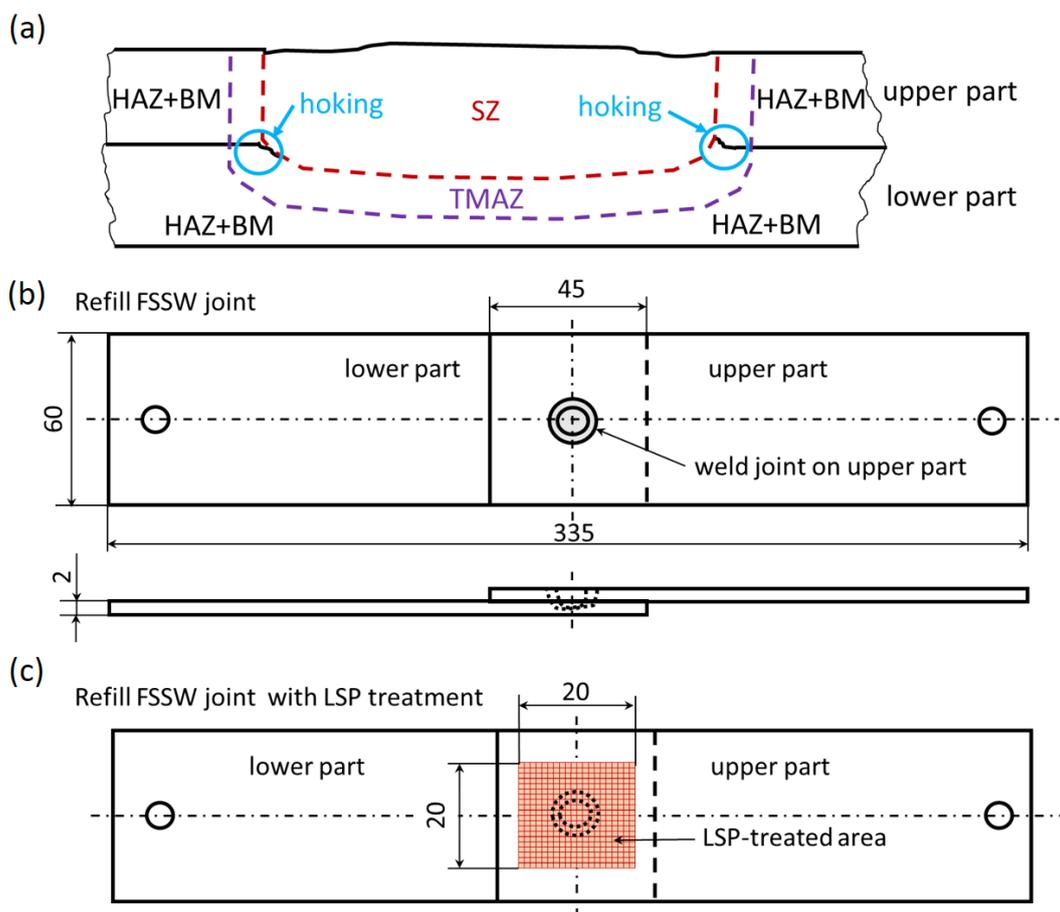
(a) Sketch of the refill friction stir spot welding (refill FSSW) joint. The abbreviations SZ, TMAZ, HAZ, and BM denote the stir zone, thermo-mechanically affected zone, heat-affected zone, and base material, respectively. Depicted and adopted from [18]. (b)-(c) Sketch of the specimens for the fatigue test: (b) as-welded specimen with overlap refill FSSW joint, (c) refill FSSW joint with LSP treatment on the upper part. All dimensions are in mm.
